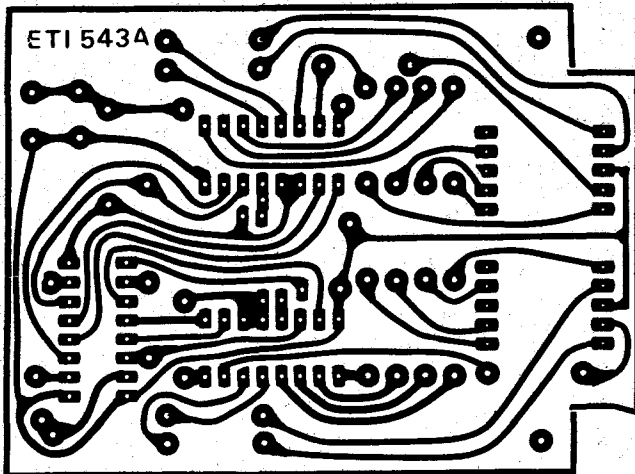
Printed circuit pattern for the display board. Full size 83 x 61mm
